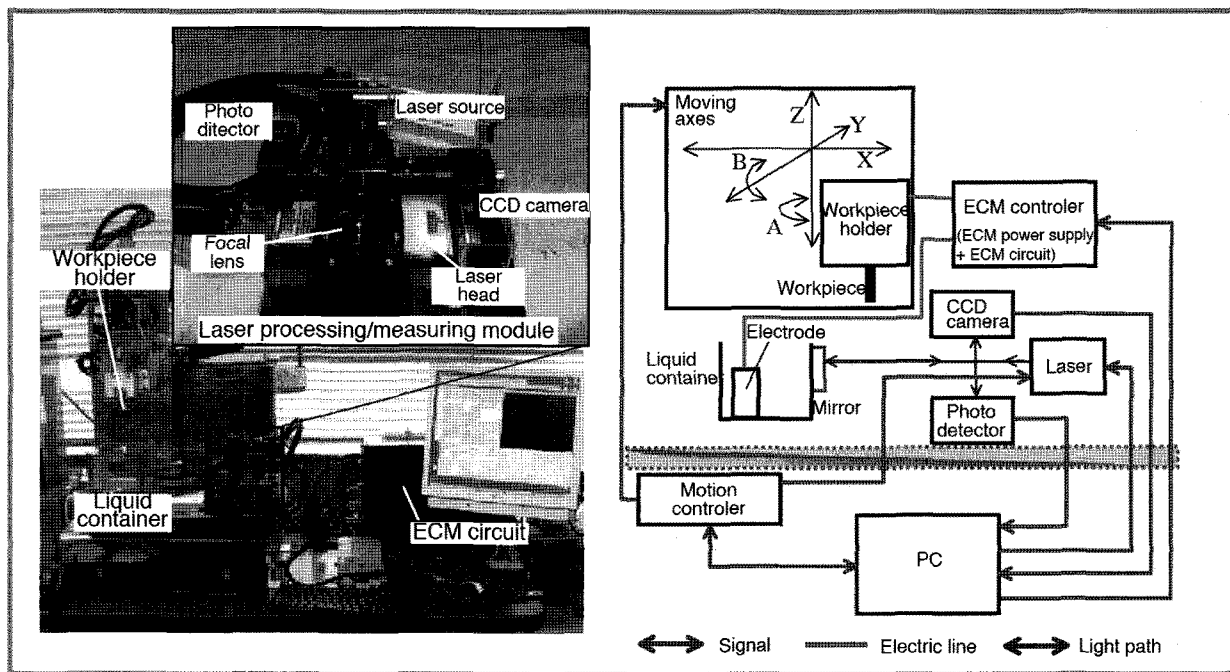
Laser/ECM complex machine tool⁽⁶⁾
